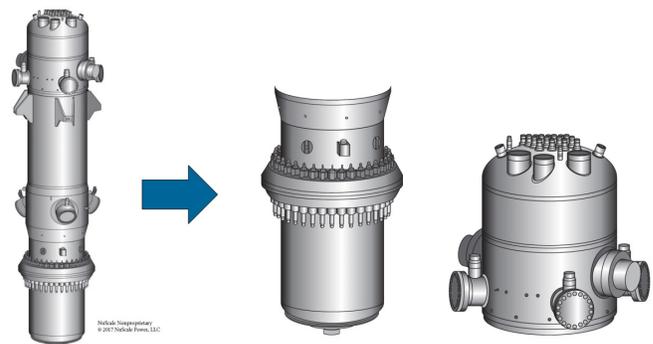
Upper and lower assemblies of the NuScale Power reactor are being assembled at 2/3-scale under this program.
